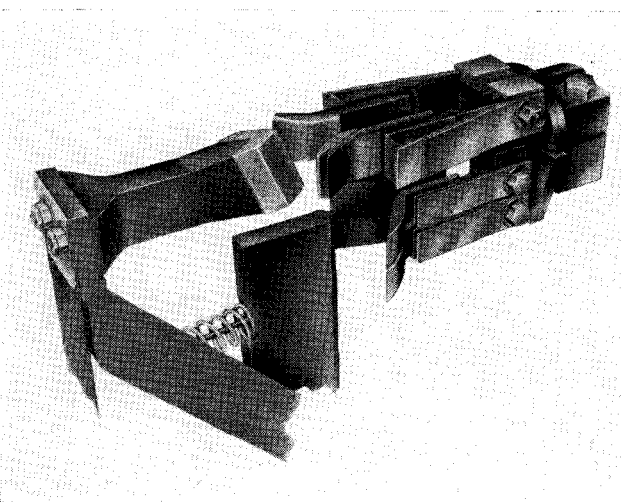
Arcing Contact Free of Shoulders, and Sprung Clear.
